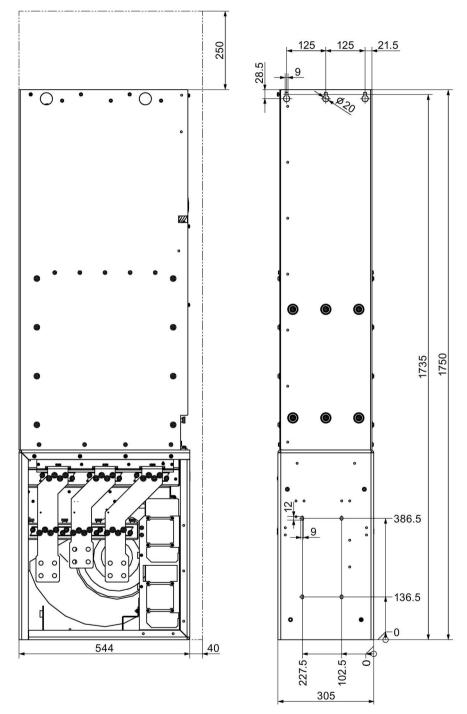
Dimension drawing for Active Interface Module, frame size GI Side view, front view
